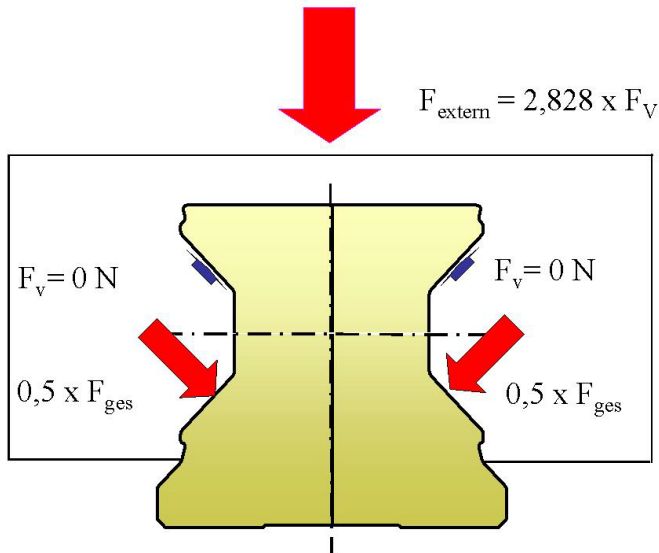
Loading of the raceways at external load of  $2,828 F_v$
